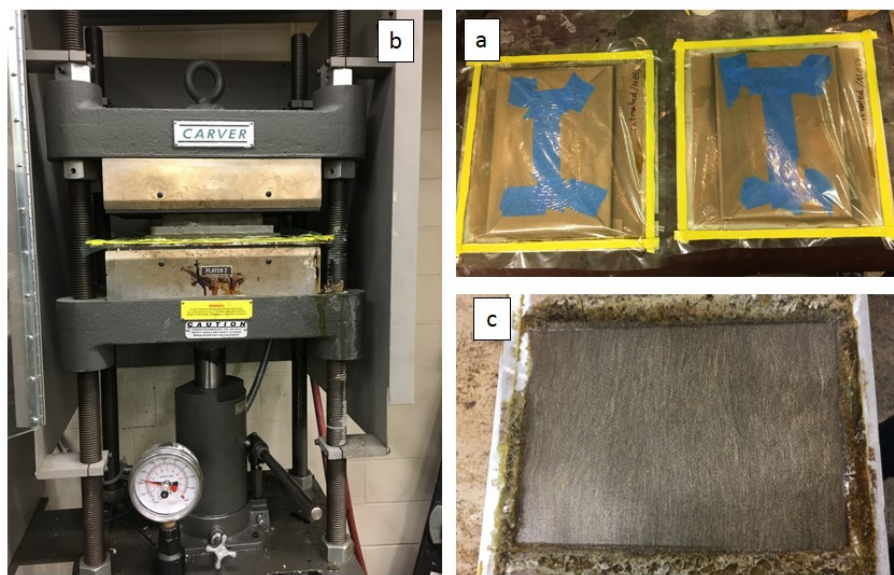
(a) Flax fibers soaked with resin and wrapped in bagging film, (b) panels in the heated press, and (c) a manufactured composite panel
